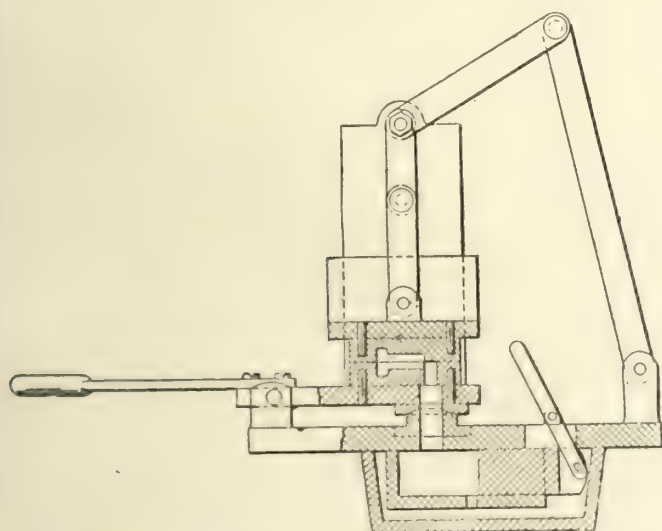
UNDERWOOD DIE-CASTING MACHINE.
